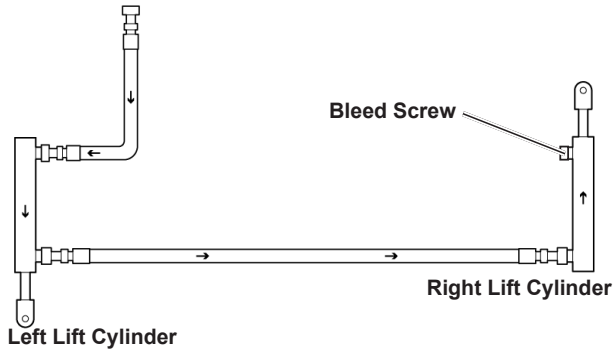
30ft and Under - Solid Reel Lift Cylinders
